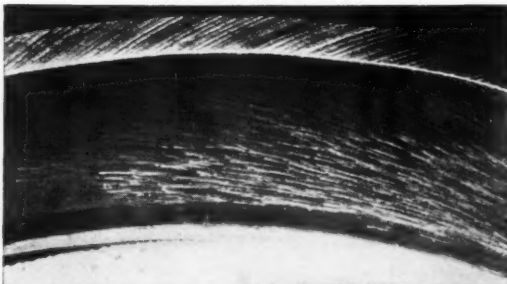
New pinion gear tooth surface—High Torque-Low Speed Axle Test.
